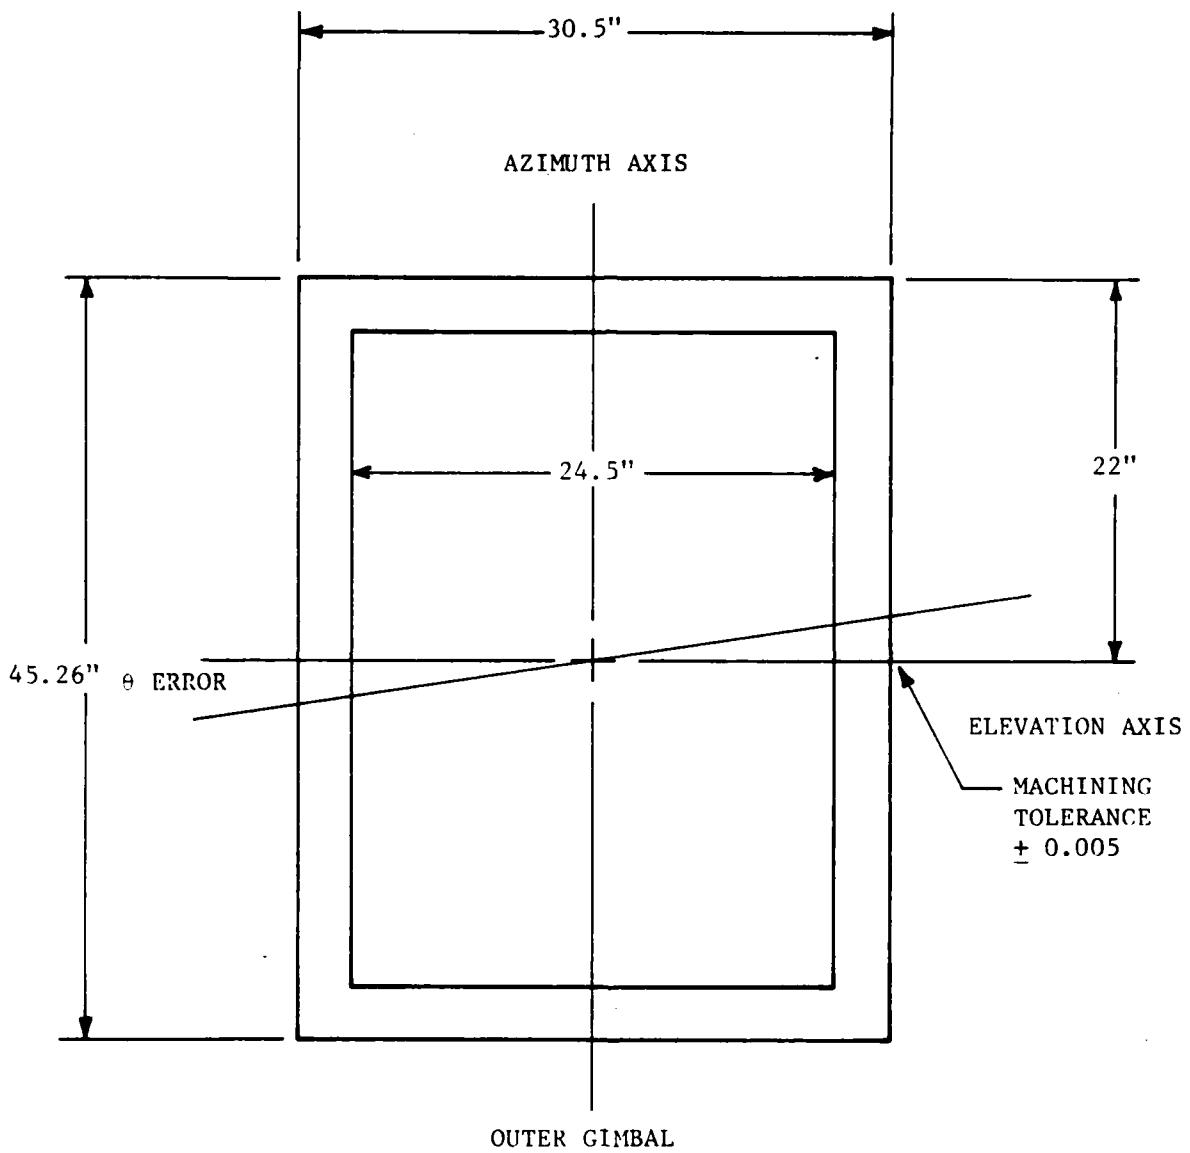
Diagram Illustrating Gimbal Misalignment Factors due to Machining Tolerances.
